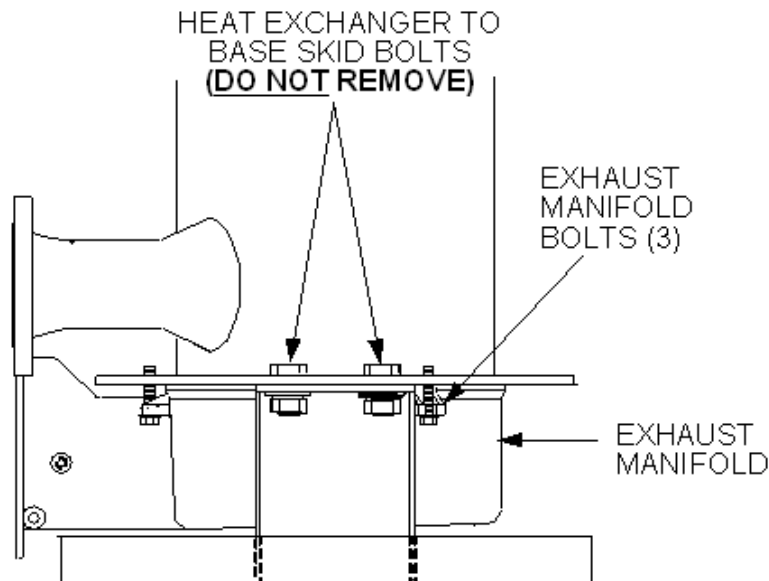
Benchmark .0LN (Venturi Design) Exhaust Manifold Location
